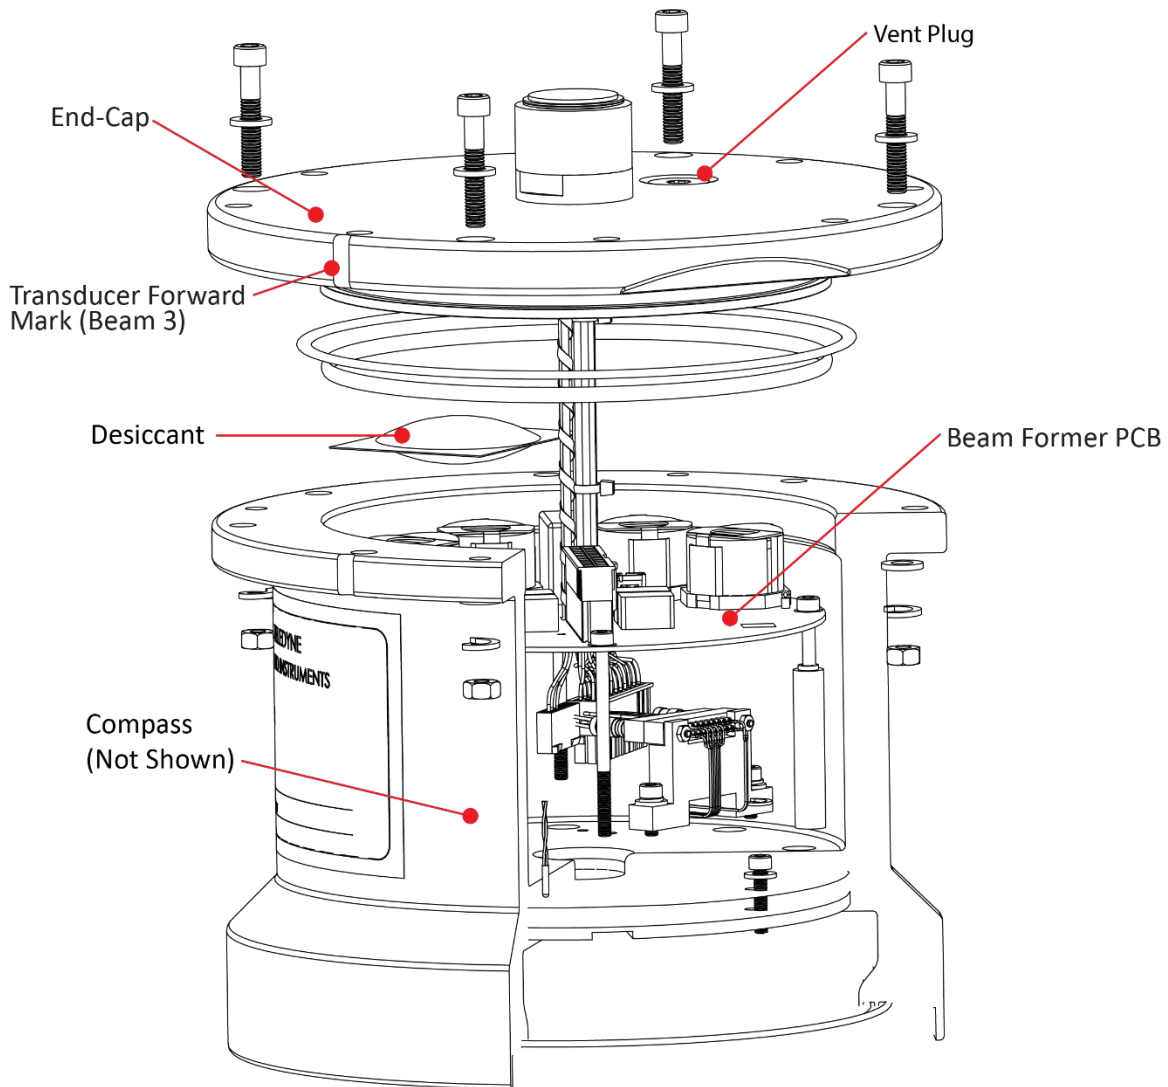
Transducer PCB Layout (150 kHz Transducer Shown)
